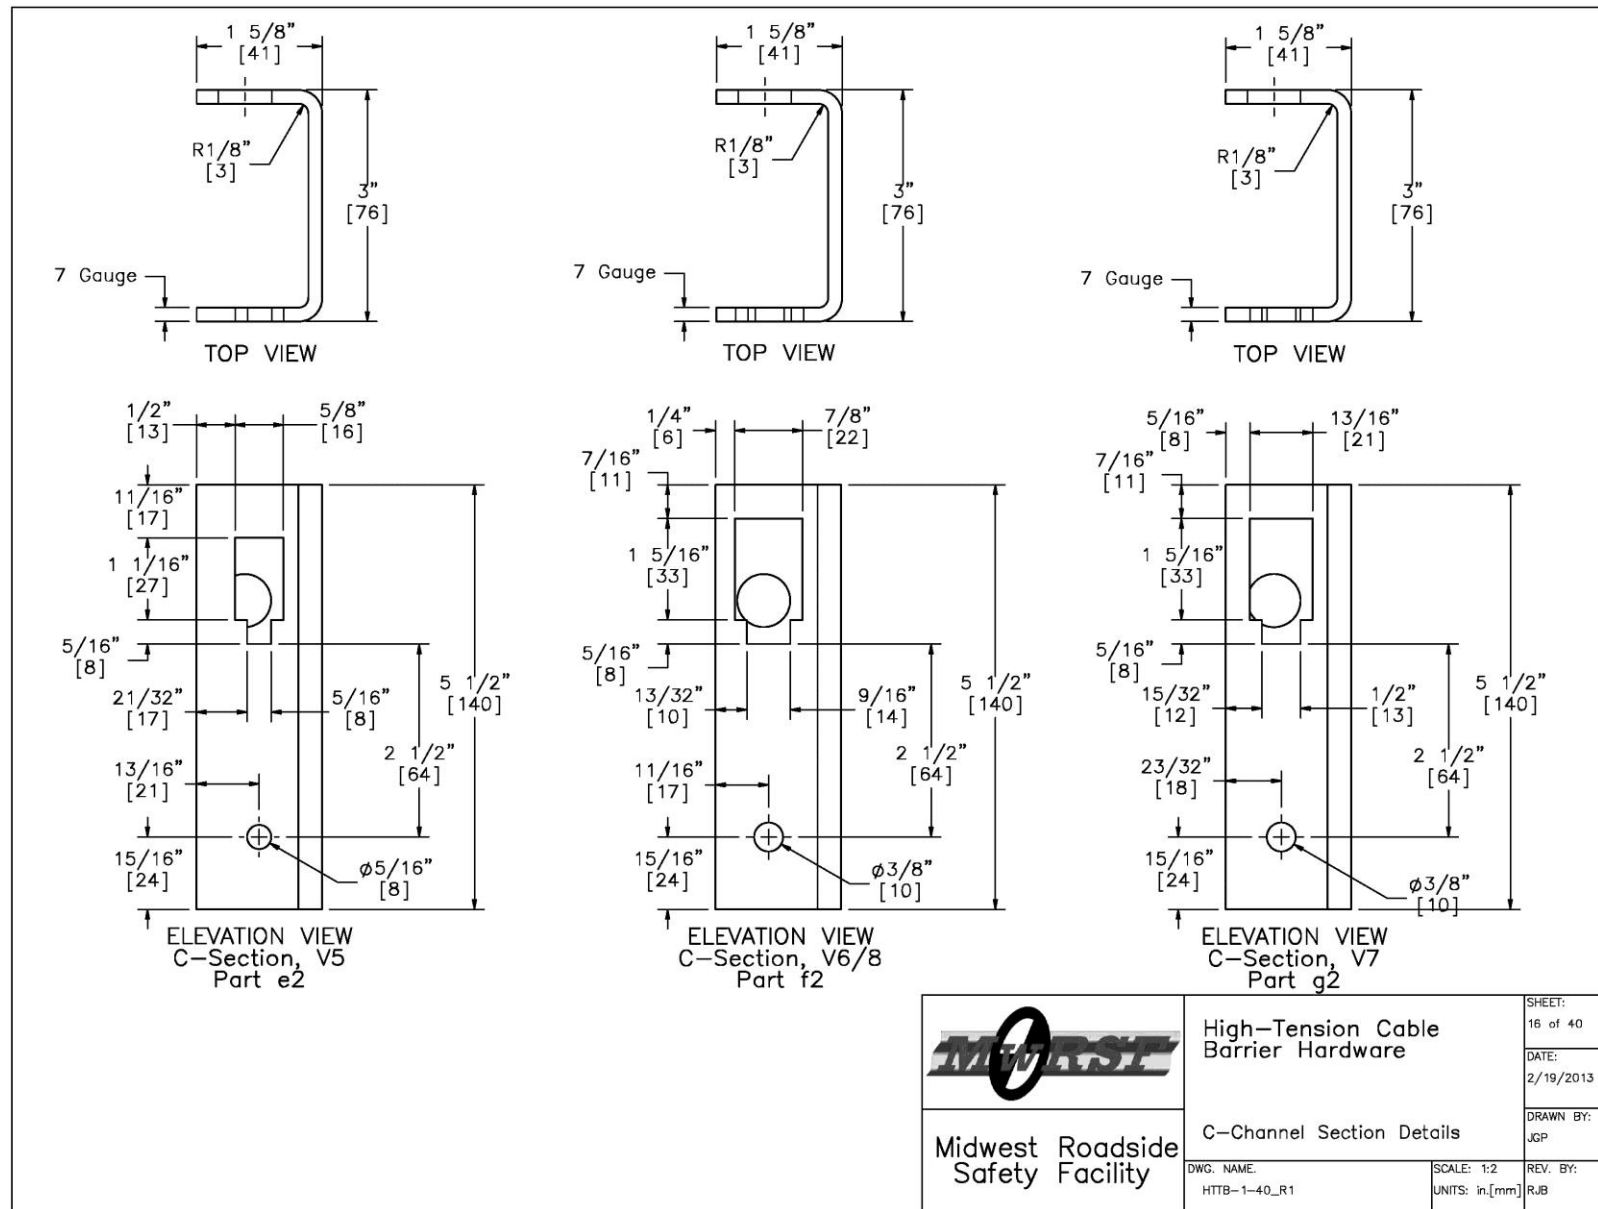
C-Section Details, Test Nos. HTTB-1 through HTTB-40
